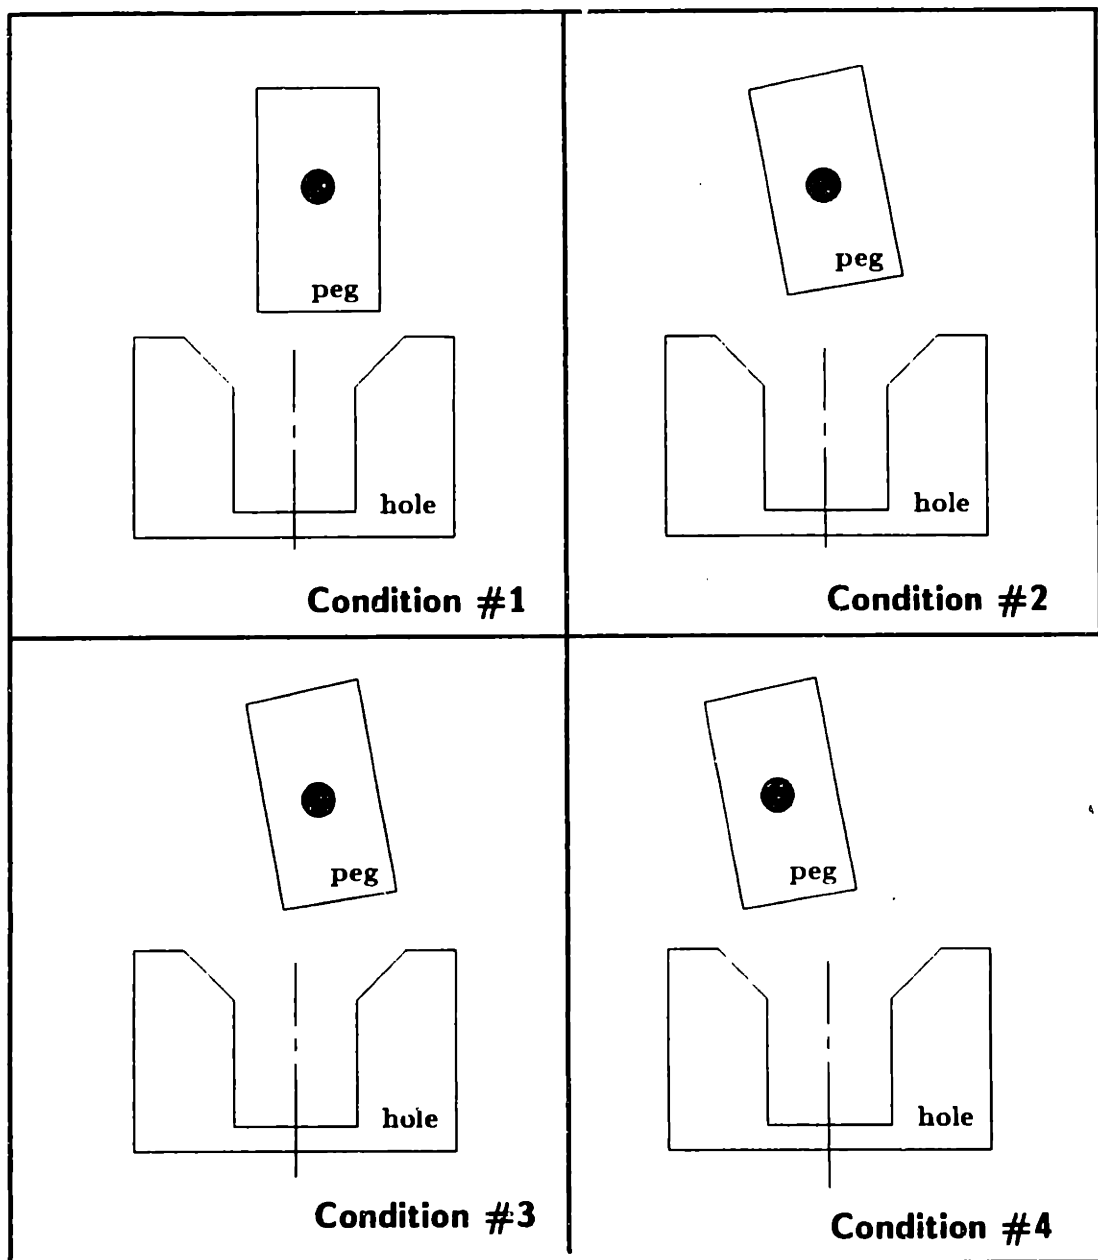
Drawing showing, in two dimensions, the four assembly initial conditions considered.
